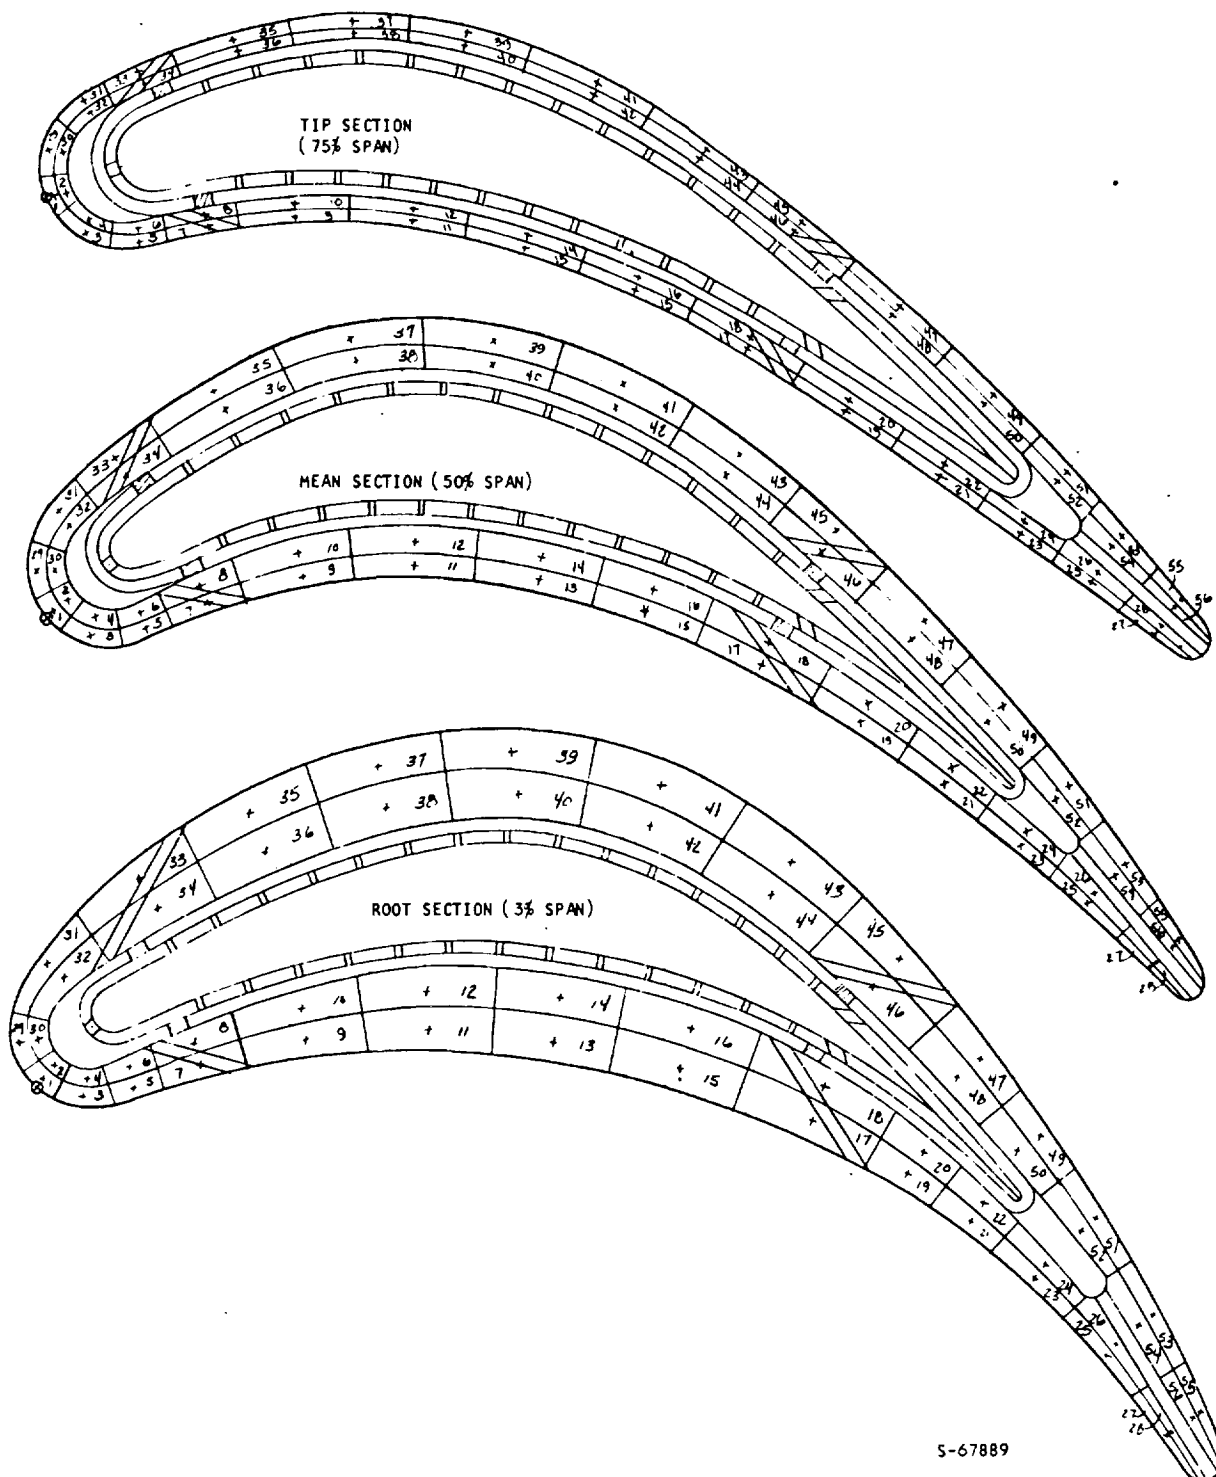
SCHEME B-5 FILM-CONVECTION COOLED FABRICATED IMPINGEMENT TUBE BLADE
